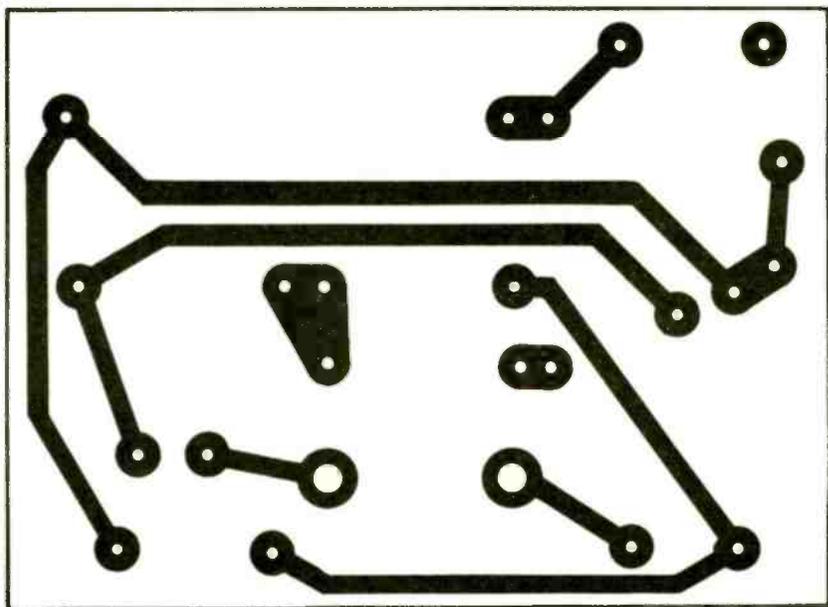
Full-size drawing of the PC board designed by the authors. Component arrangement can be seen in the photo above and in Fig. 3. The diameter of the large holes should be adjusted to suit the milliammeter lugs used in your project. Some meter lugs are this diameter, but others are somewhat larger.
